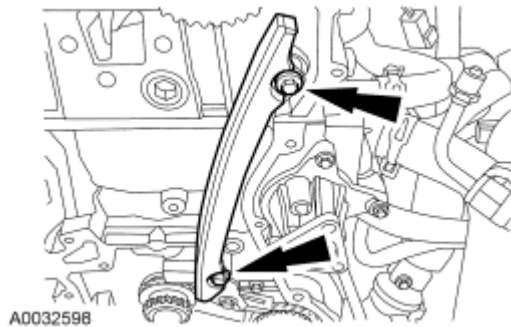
Identifying Bolts And LH Timing Chain Guide
